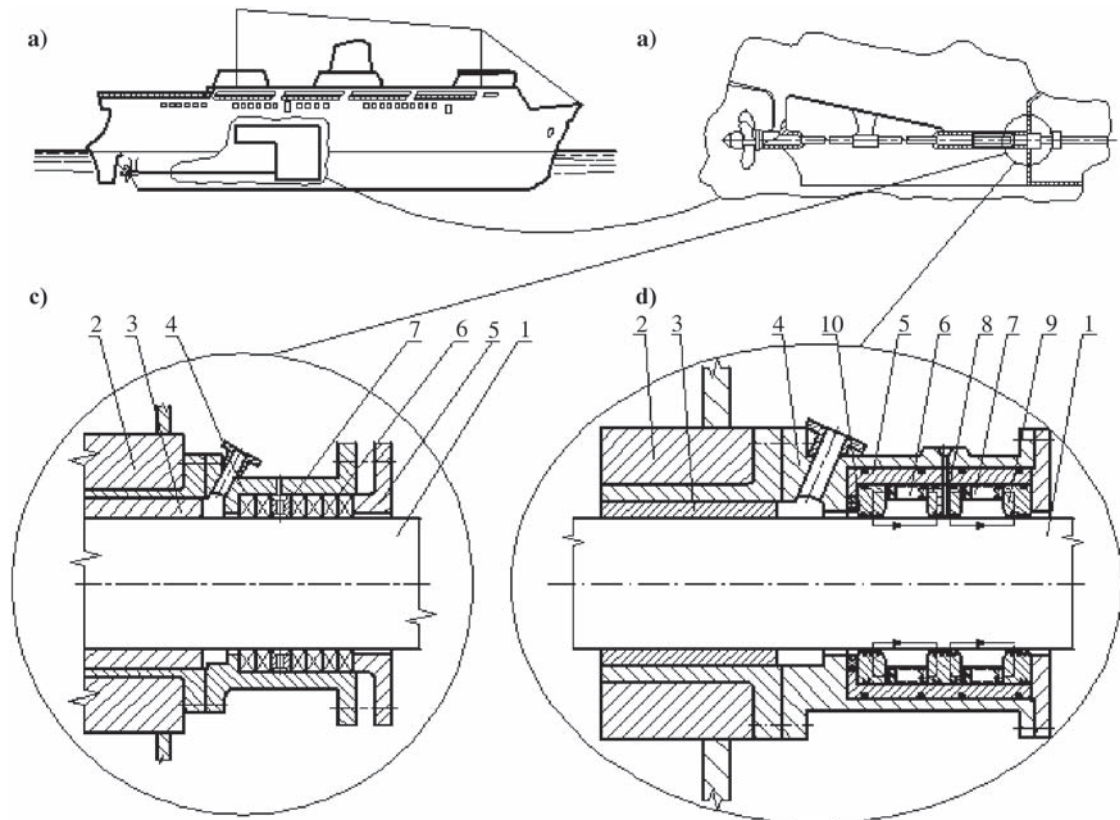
Seal for ship propeller shaft: a) sea-going vessel with marked position of the propeller drive system; b) scheme of propeller drive system; c) typical packing seal for propeller shaft: 1 – propeller shaft, 2 – body, 3 – slide bearing, 4 – seal casing, 5 – gland, 6 – package of sealing rings, 7 – distance ring; d) magnetic fluid seal: 1 – propeller shaft; 2 – body; 3 – slide bearing; 4 – seal casing; 5 – non-magnetic sleeve; 6, 7 – permanent magnets; 8, 9 – multi-edge pole shoes; 10 – magnetic fluid
